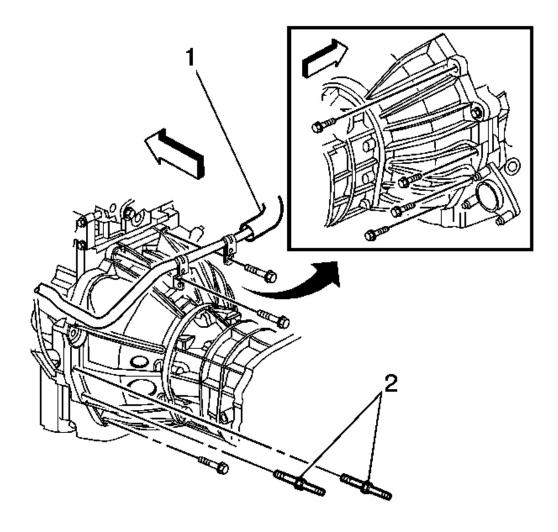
View Of Transmission Mounting Bolts Courtesy of GENERAL MOTORS CORP.
